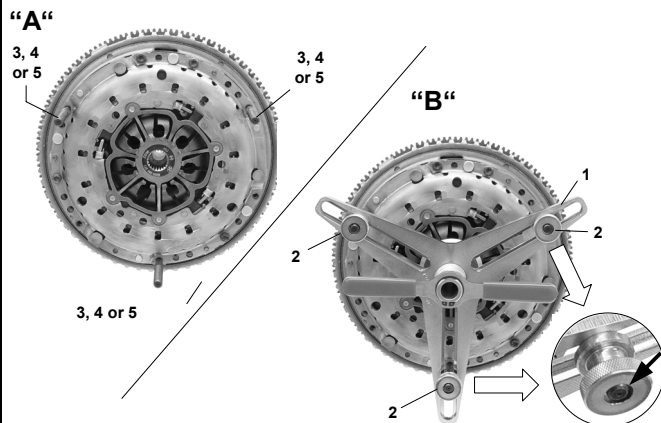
Screw in pressure spindle, Unscrew retaining screws.
